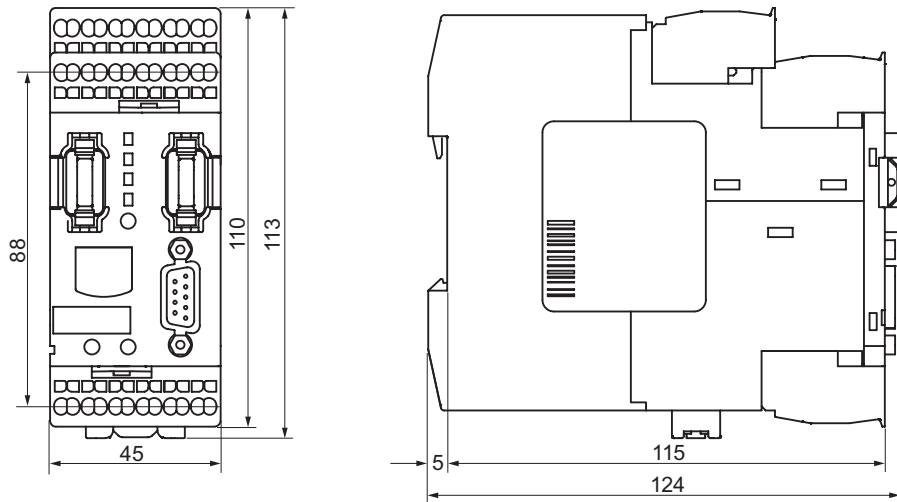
Dimension drawing DP / AS-i F-Link with spring-loaded terminals (MLFB: 3RK3141-2CD10)
